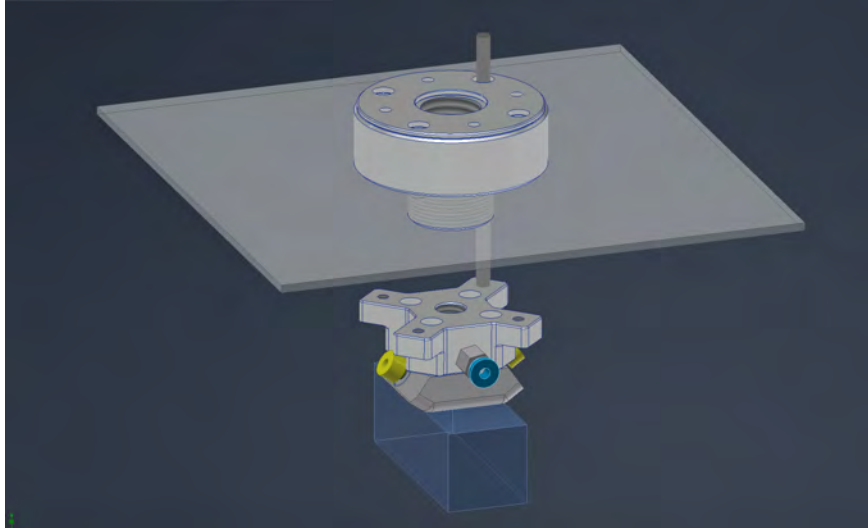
Assembly of the ablation chamber positioned under a plane representing the optics enclosure, showing the mounting features for alignment and stability.
